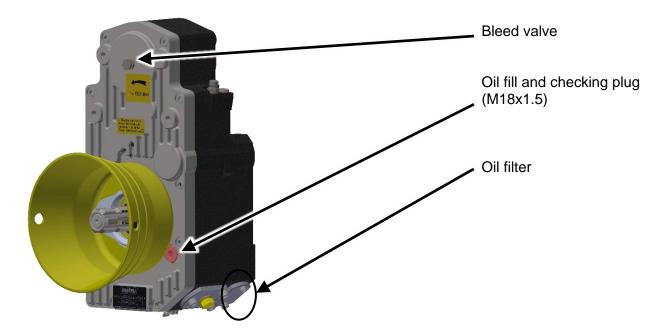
Position of bleed valve / oil fill plug / oil filter
